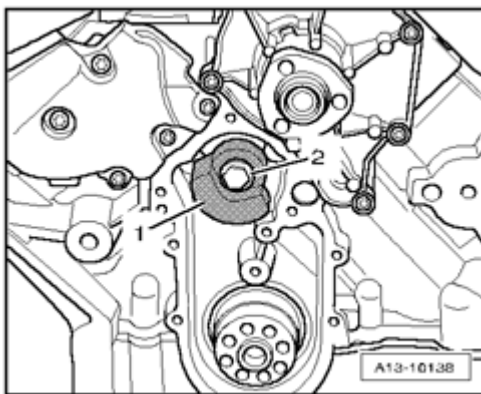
Removing Bolt, Counter-Holding Balance Weight With Drift And Removing Balance Weight From Balance Shaft At Front Of Engine
